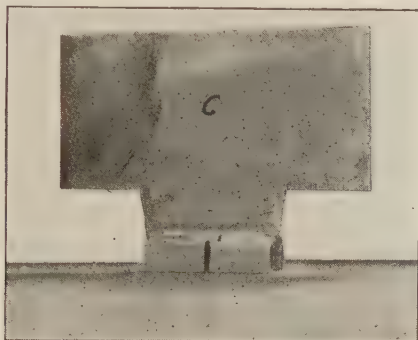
Piece used to Mount Specimens as Shown in Fig. 6.
